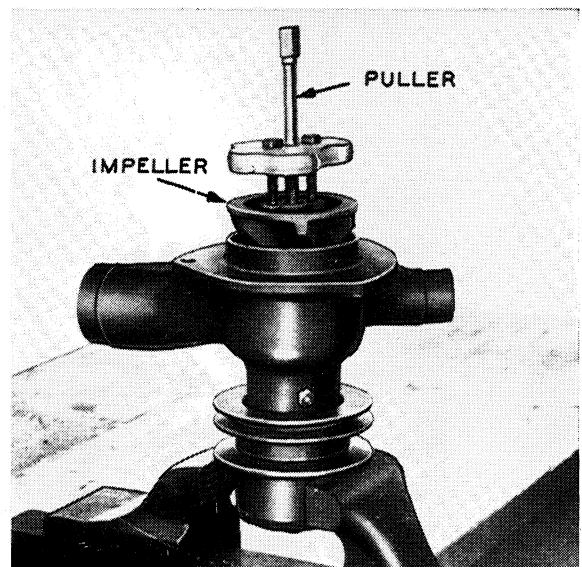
Using No. 915 Puller to remove the water pump Impeller
